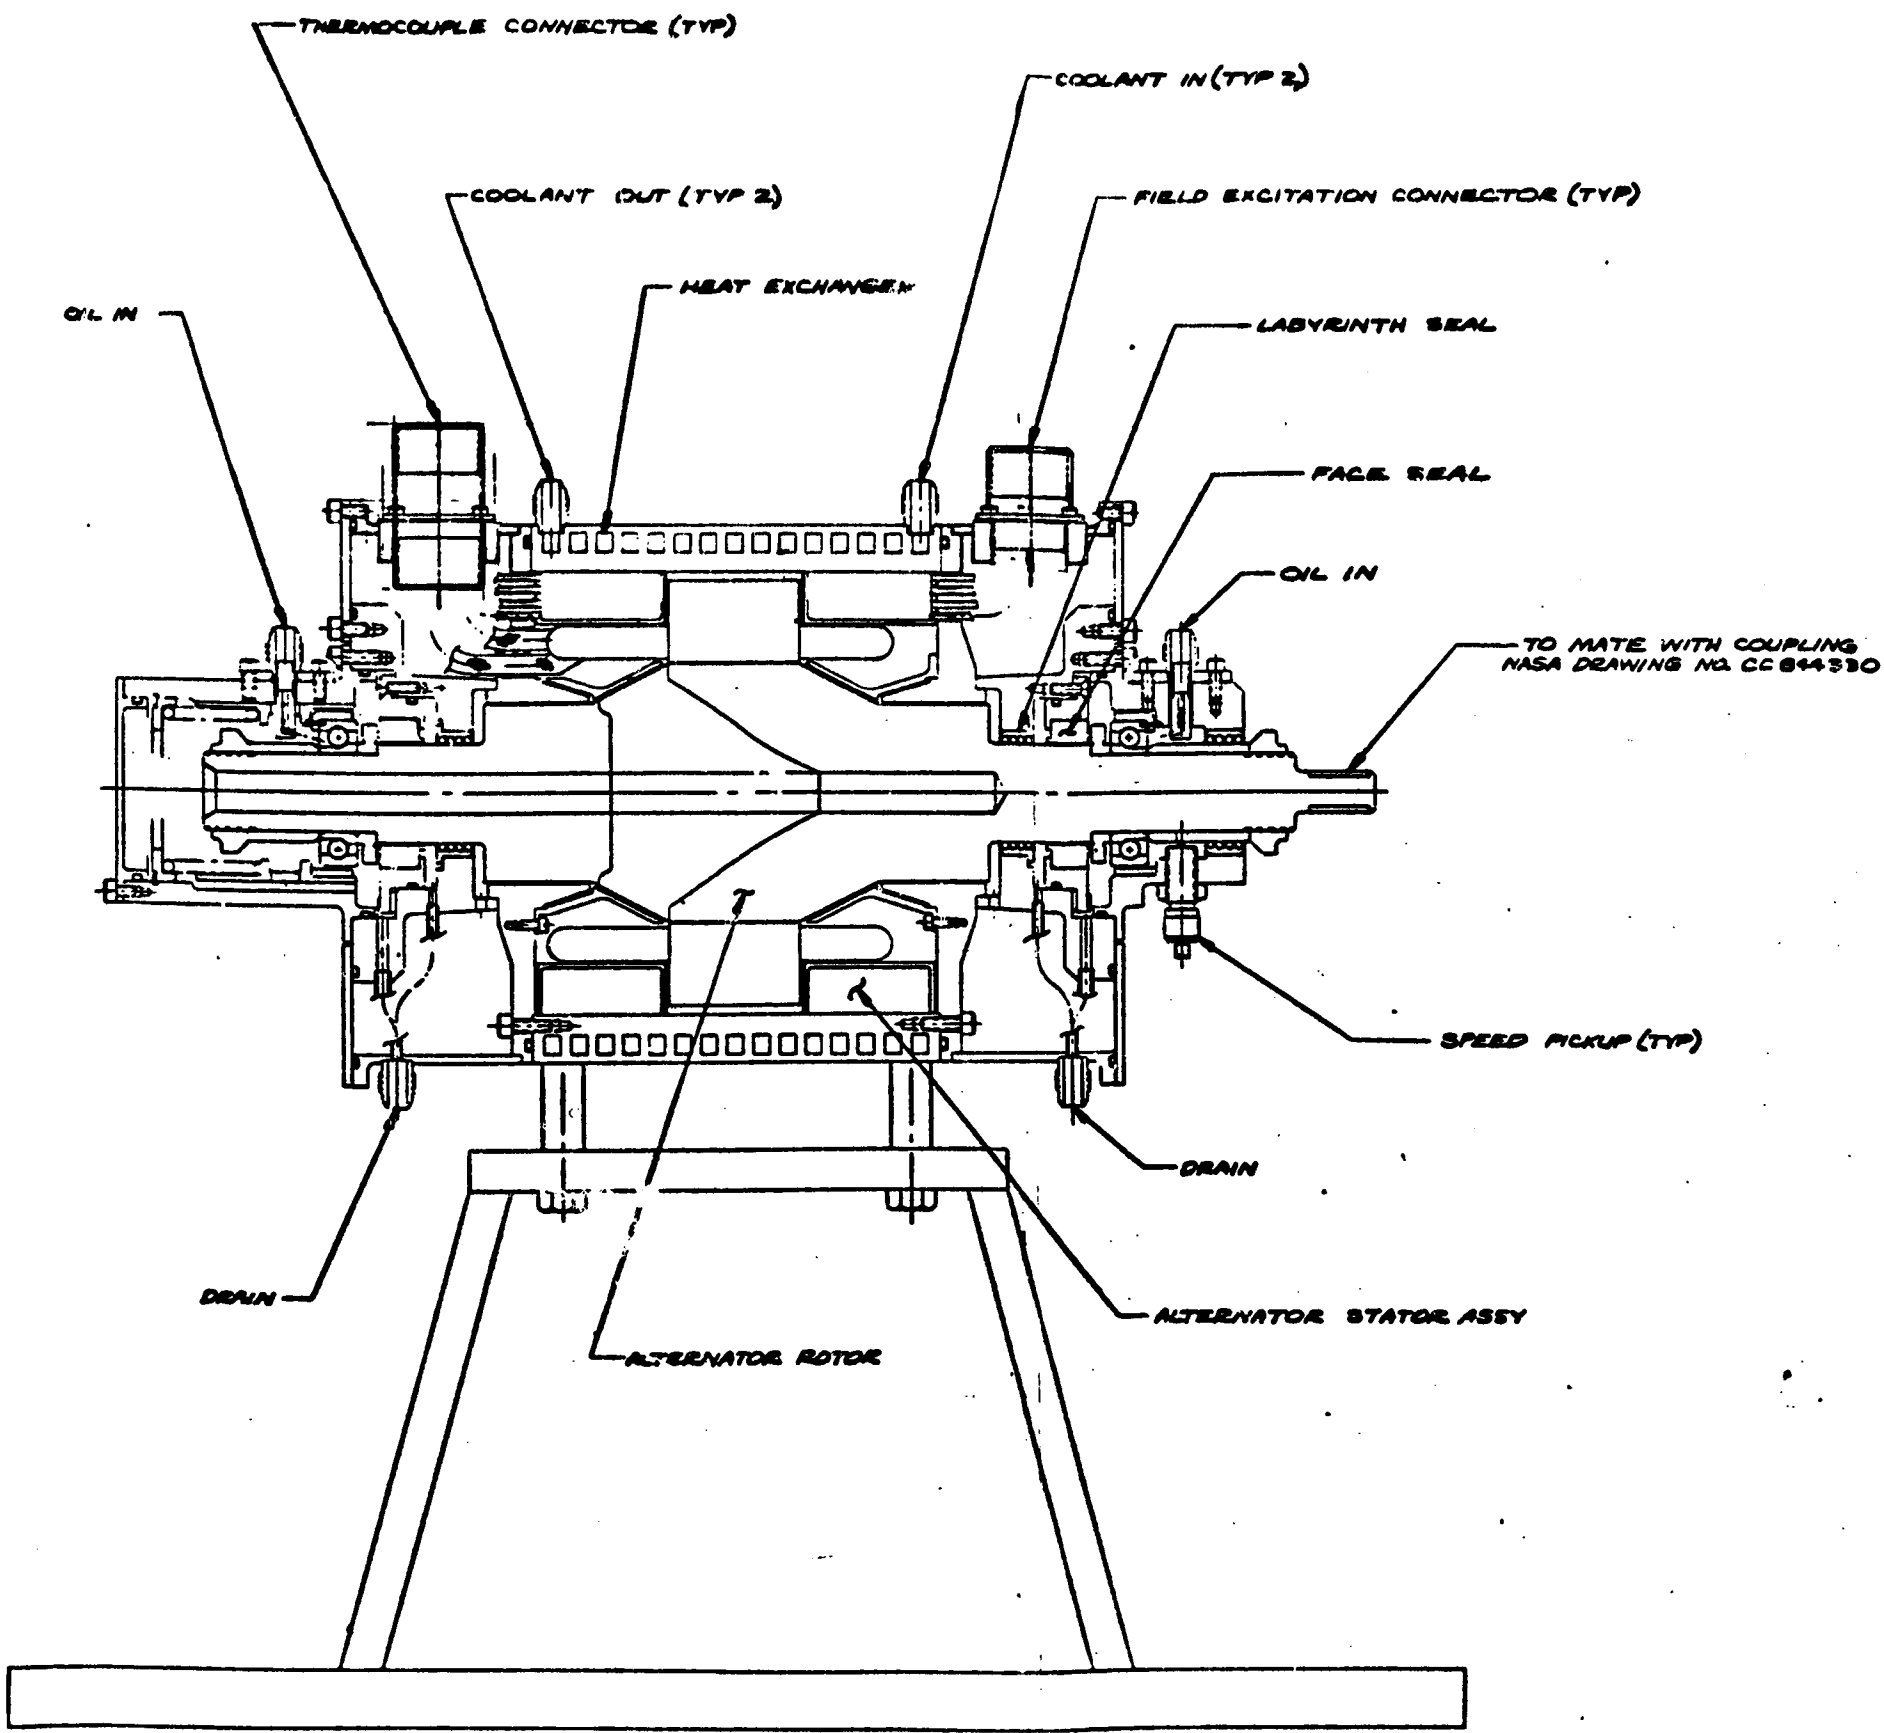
presents a cross-sectional view of the alternator research package (ARP). The unit consists basically of the same alternator electromagnetic configuration and cooling system that is to be utilized in the Brayton rotating unit (BRU) but mounted on oil-mist-lubricated ball bearings. A buffer seal arrangement at the rotor cavity and an external gas supply fitting is provided so that BRU alternator cavity ambient conditions can be simulated during alternator performance evaluation. Drawings of the bearings and seal arrangement are included in Appendix II. The ARP is driven with a turbine assembly
